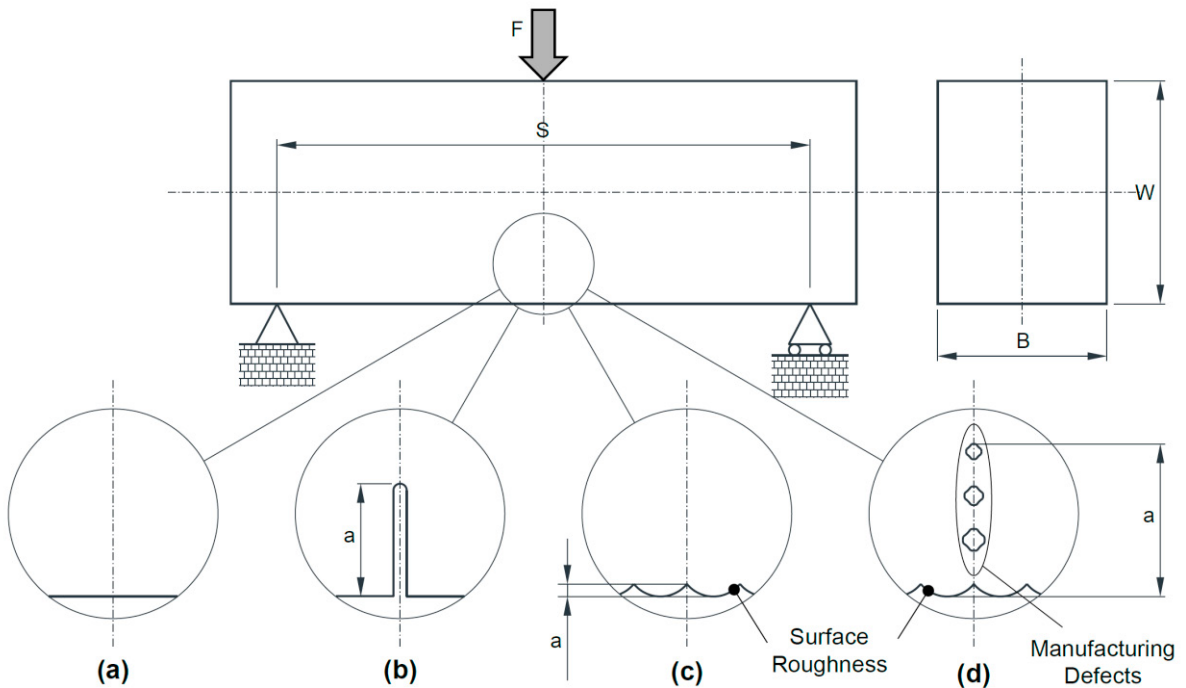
3D-printed specimens tested under three-point bending: plain specimen (a); specimen containing a saw-cut crack-like sharp notch (b); specimen weakened by surface roughness (c); specimen weakened by manufacturing defects (d).
